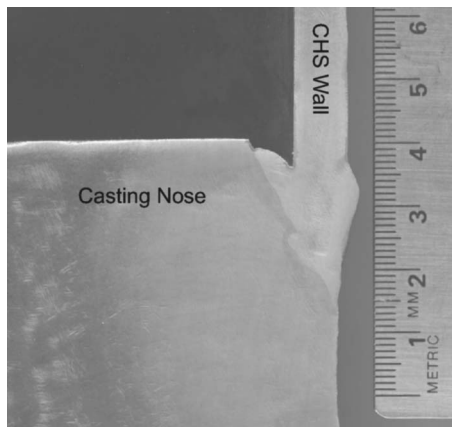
Section through CJP groove weld between cast connector and CHS member
